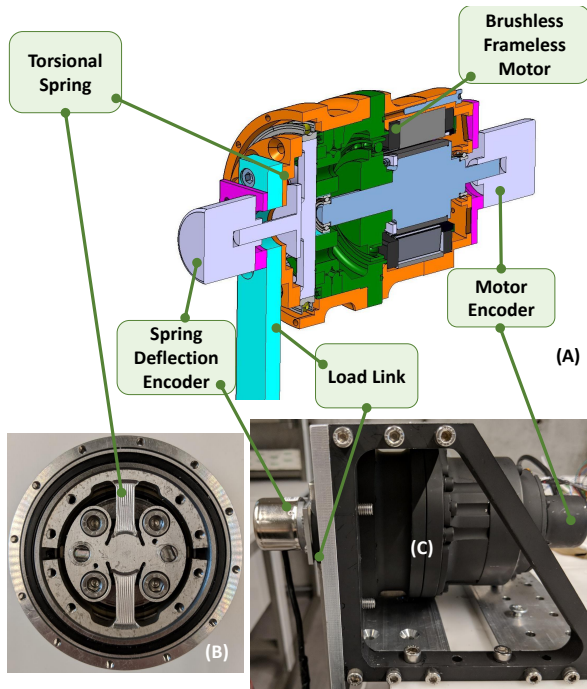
(A) CAD drawing of the SEA unit. (B) The torsional spring mounted at the output. (C) The actual SEA unit for the experiments.
